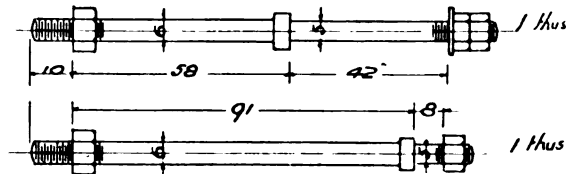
H.-P. AND L.-P. VALVE SPINDLES
